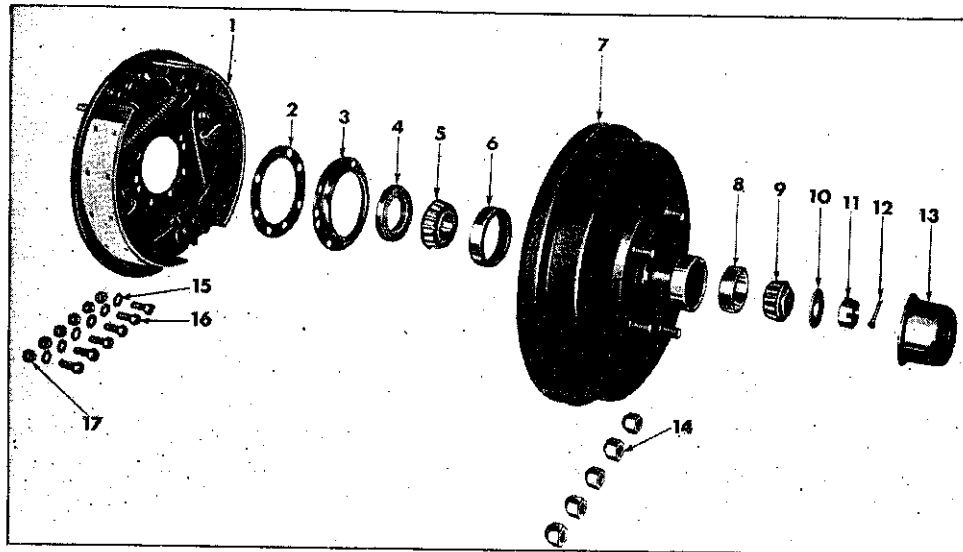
FRONT WHEEL ATTACHING PARTS — 2-WHEEL-DRIVE VEHICLES
